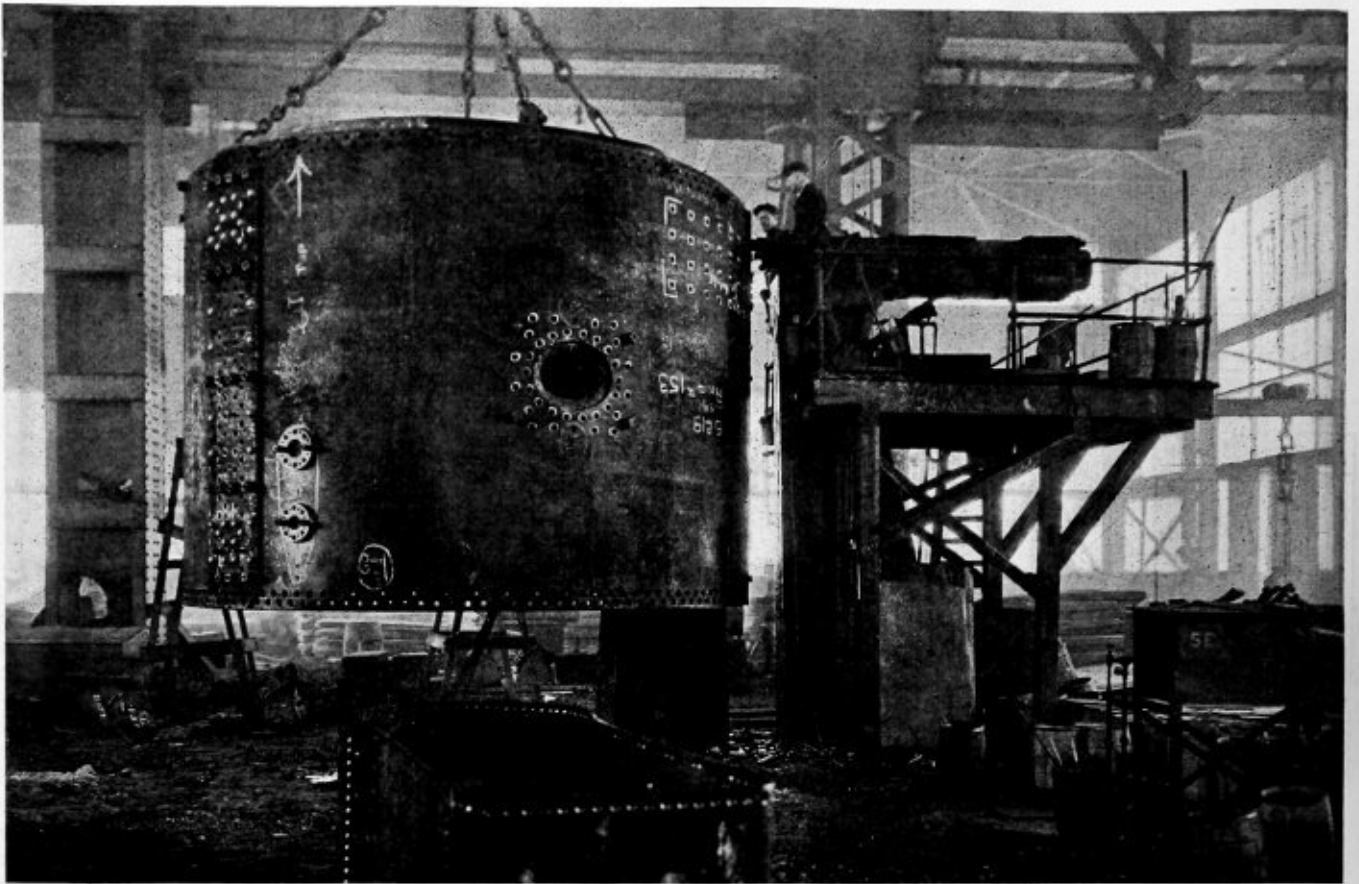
Head, Butt Straps and Manhole Plates Being Riveted on One of the 200-Ton Hydraulic Riveters
